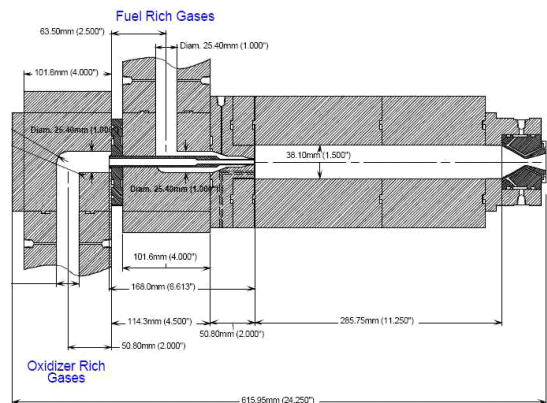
Schematic of the Shear Coaxial Element and Combustor Test Rig integrated oxidizer-rich and fuel-rich preburner[2].
